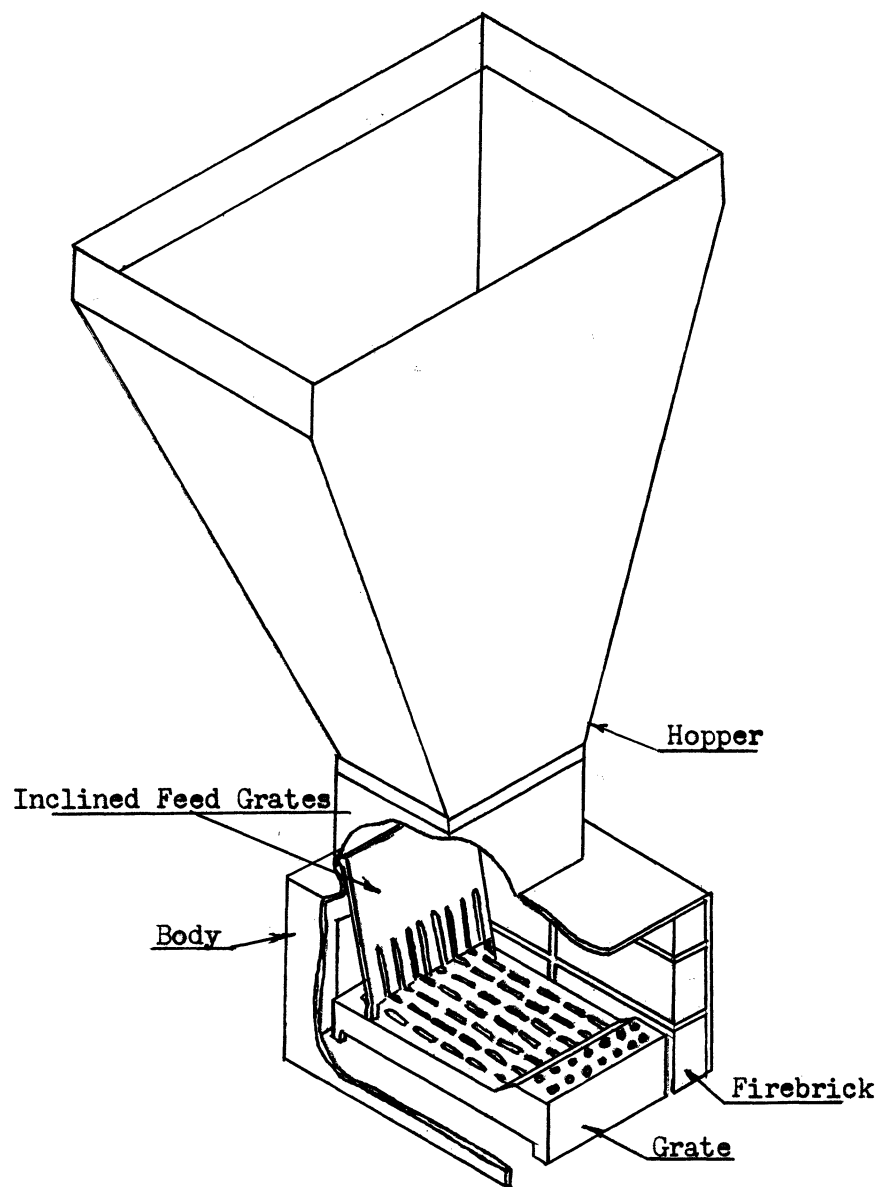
Cutaway View of Typical Sawdust Burner<sup>1</sup>
